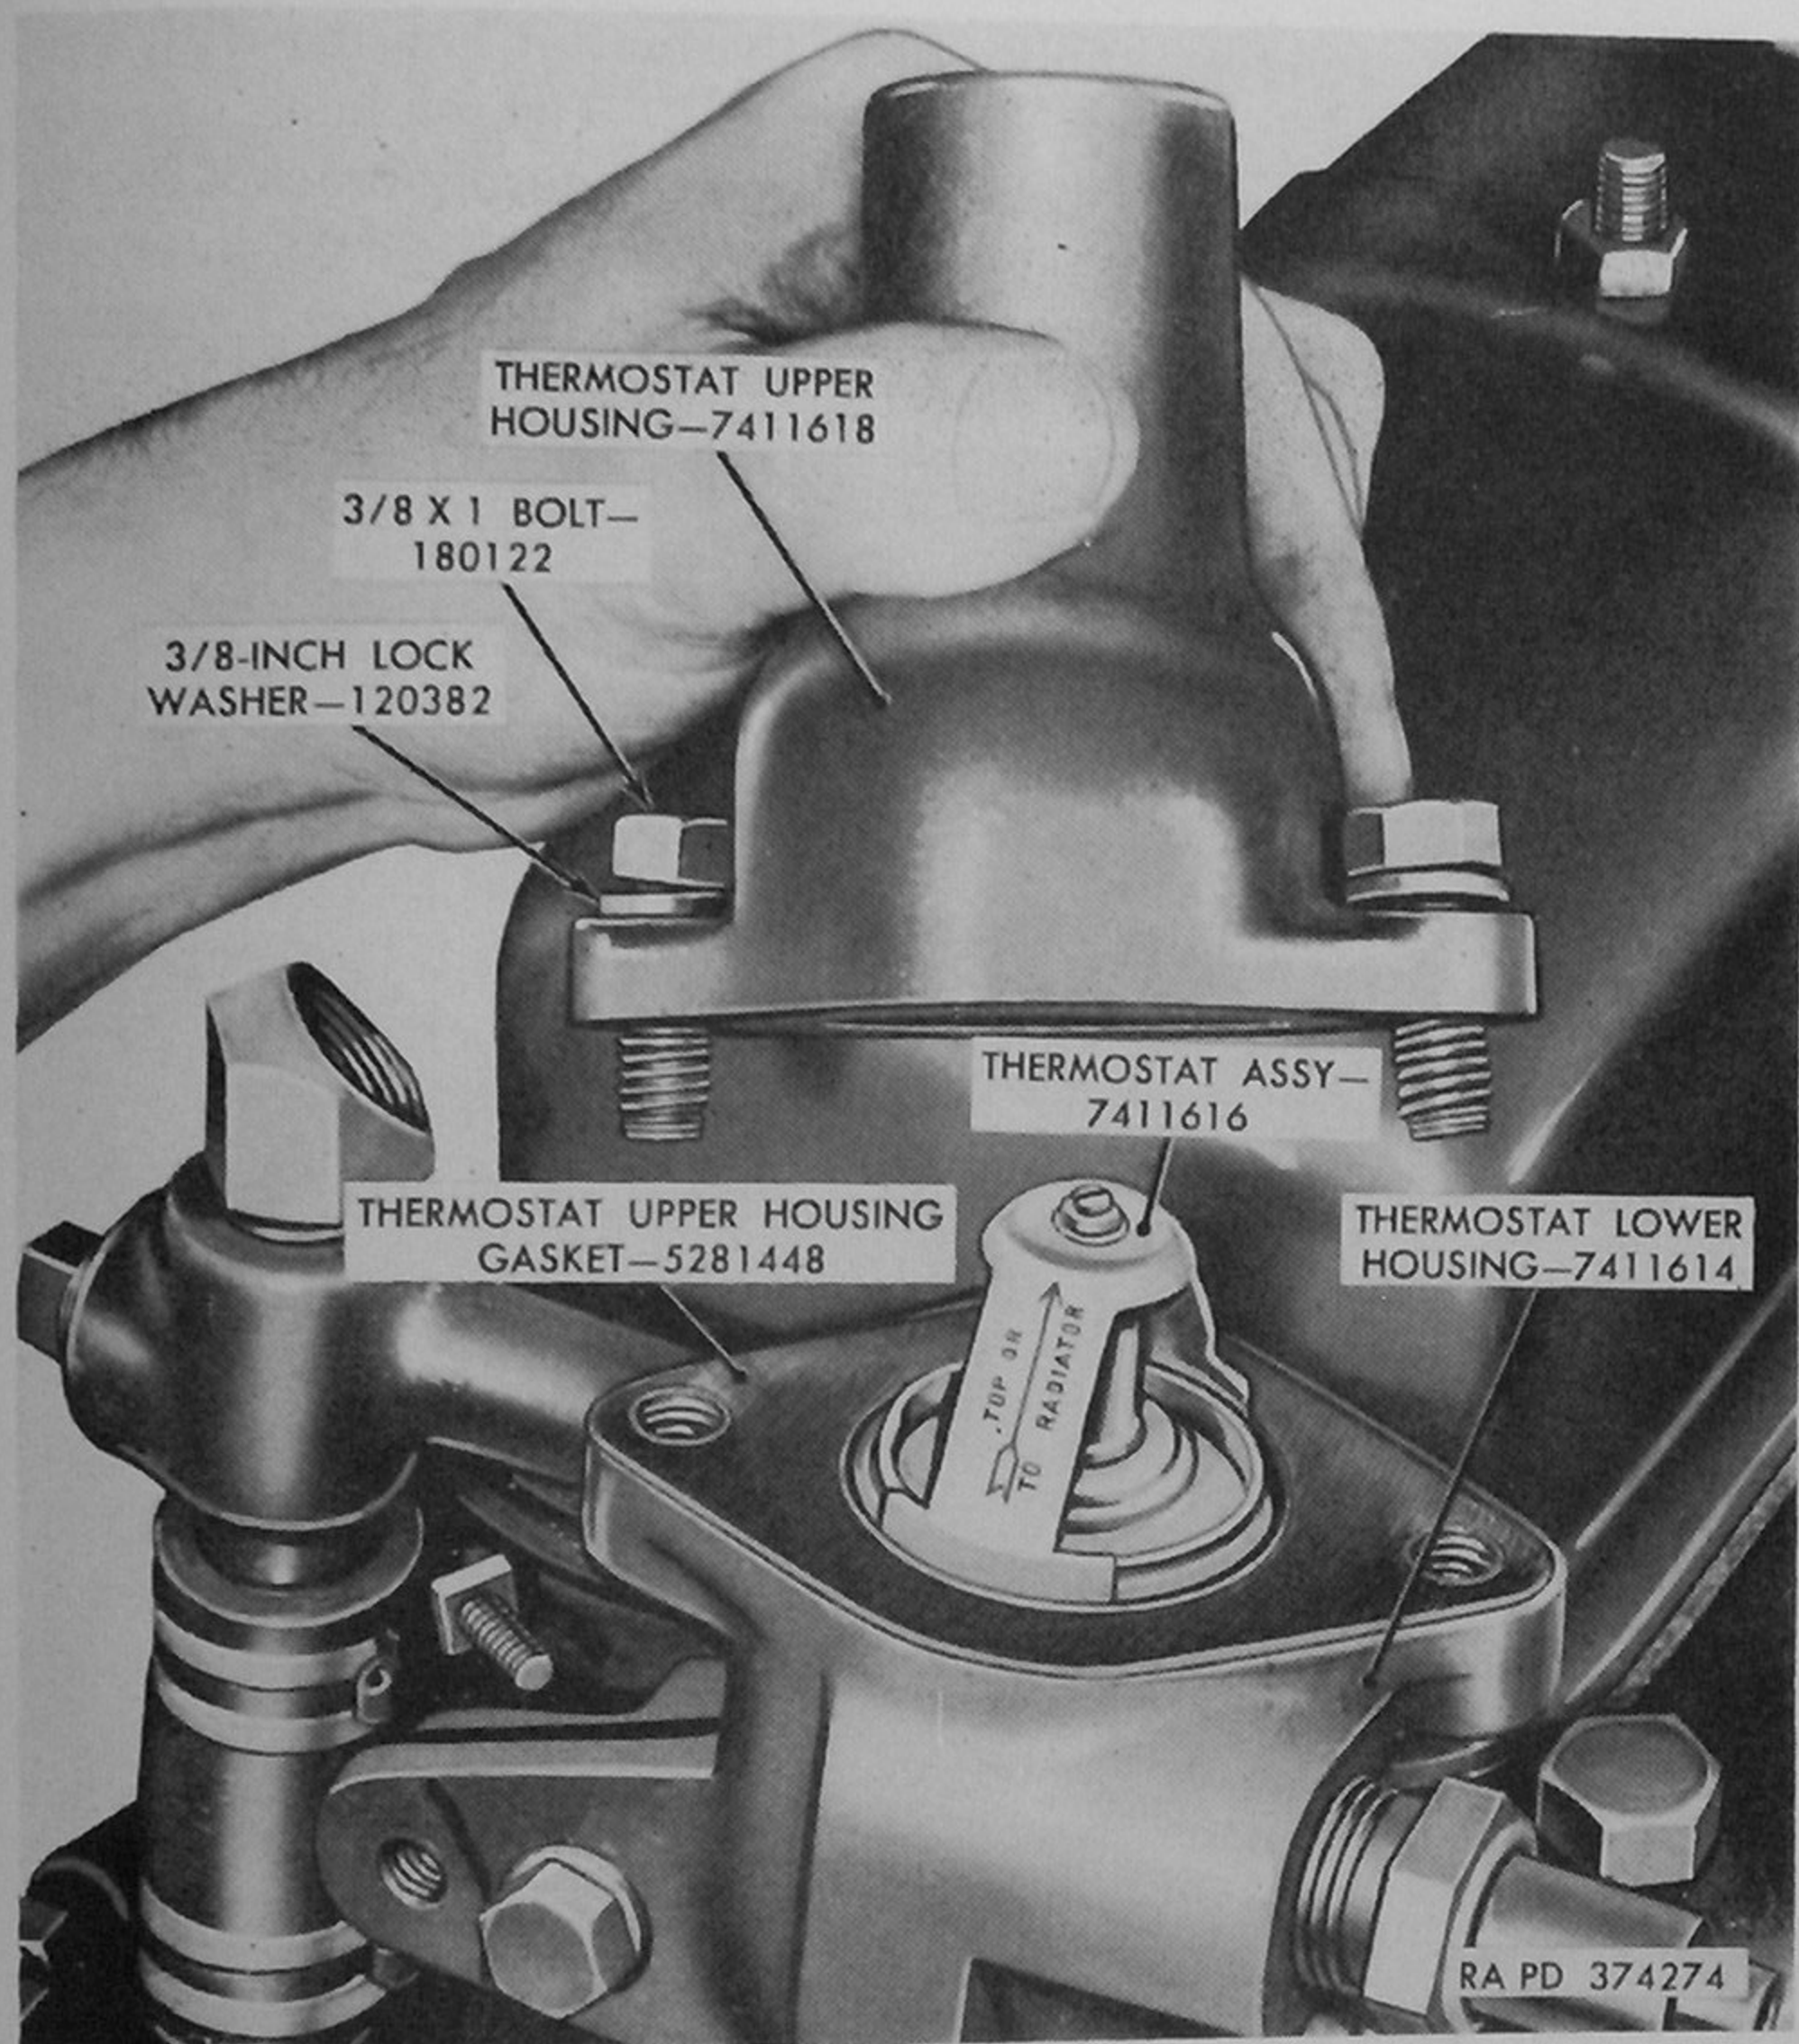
Removing or installing thermostat assembly—engine assemblies 7411599 and 8329440.
